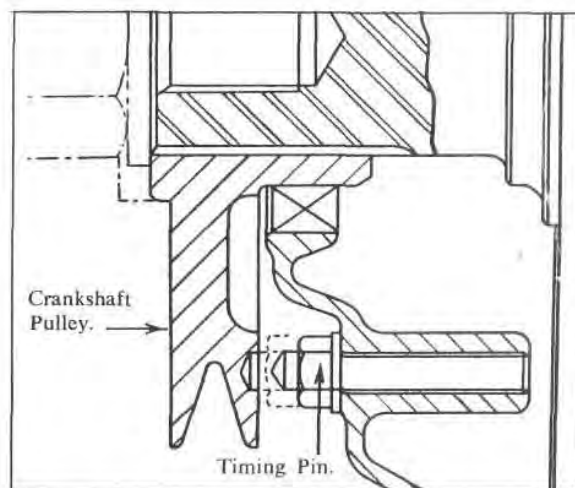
Timing Pin Located in Crankshaft Pulley
